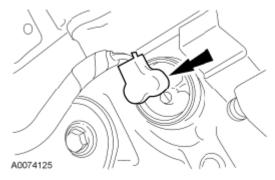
Locating Cylinder Block Opening Cover Courtesy of FORD MOTOR CO.
